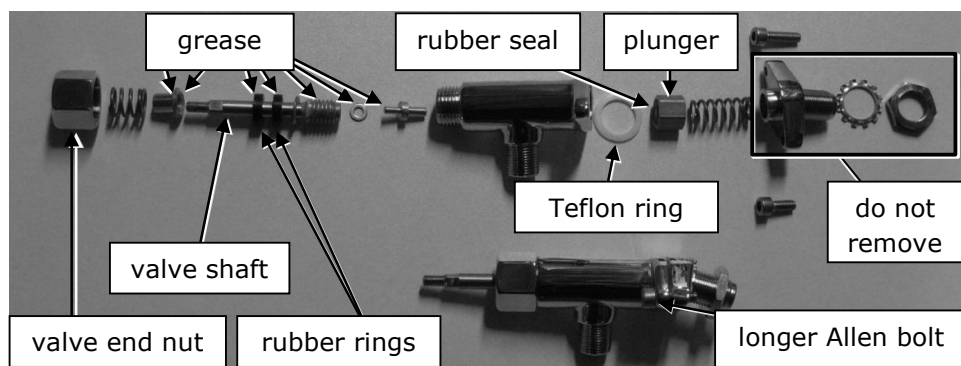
Exploded view of steam valve and assembly. The base of the valve will remain attached to the Speedster. Note position of longer Allen bolt on top side of assembled valve. On the machine, the longer bolt is in the lower position. The rubber sealing rings are not removed from the valve shaft.
